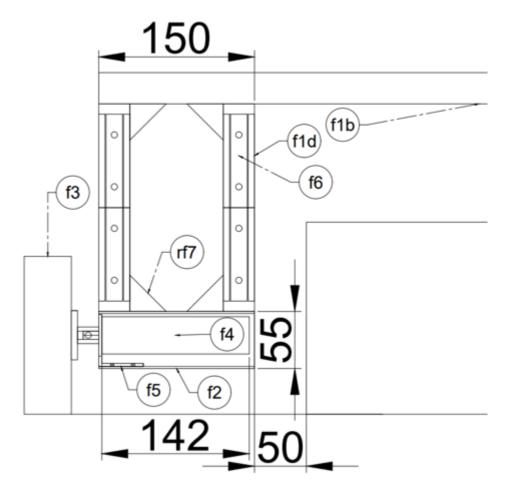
Moving Frame Orthographic Drawing - Full View
